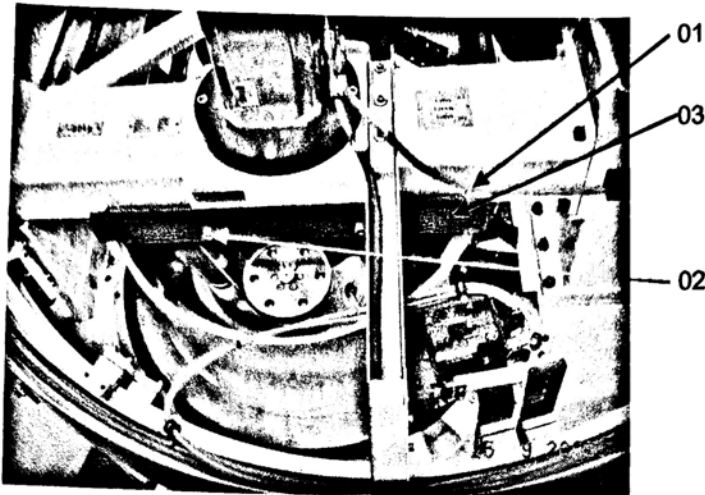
Rail, RAG Art. no. 332626.00; Safety device for workpiece turret
